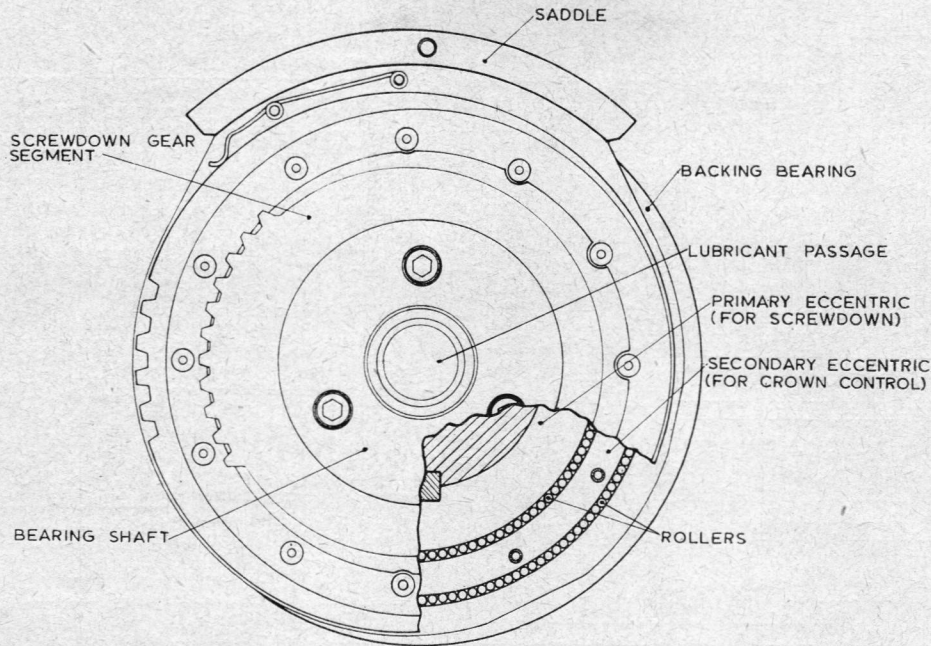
End view of a typical backing assembly of a Sendzimir cold rolling mill
